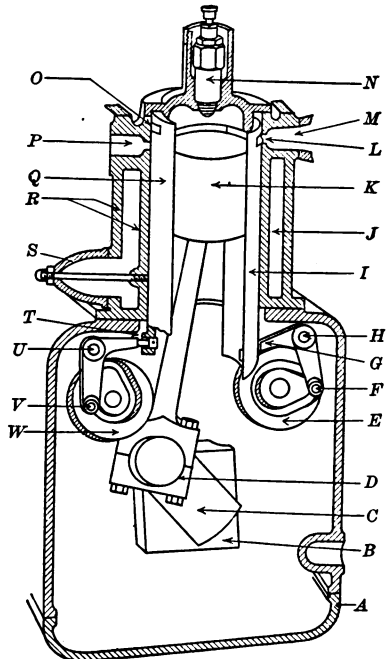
FISCHER ENGINE WITH CRESCENT-SHAPED VALVE SLIDING BETWEEN CYLINDER WALL AND PISTON
